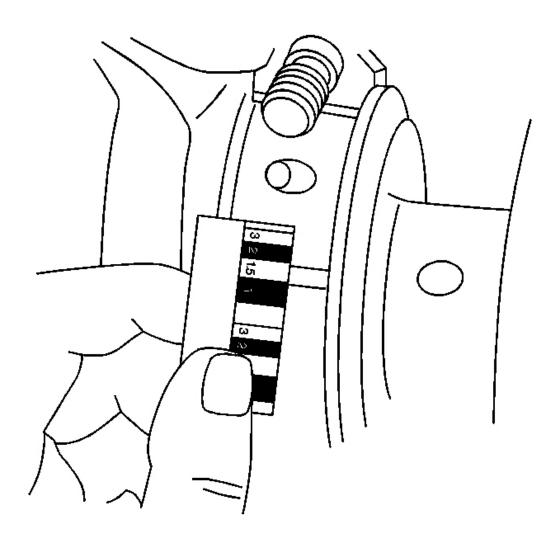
Measuring Gaging Plastic Courtesy of GENERAL MOTORS CORP.
